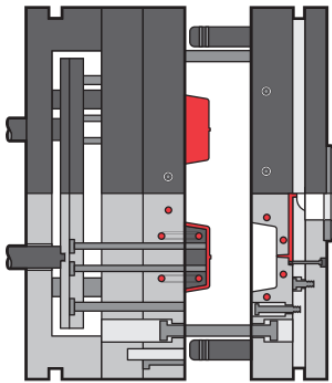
Schematic of a two-cavity, three-plate mold with cutaway view showing first stage of opening.
